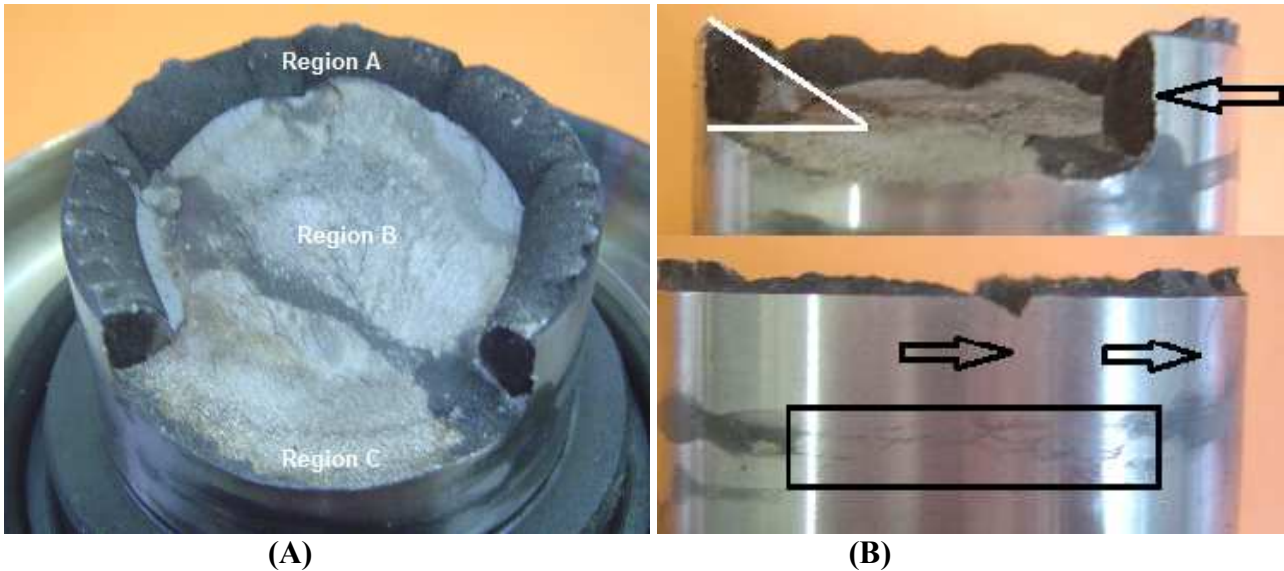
(A) General view of the fracture surface of a cardan yoke. (B) Side views of a fractured cardan yoke.
